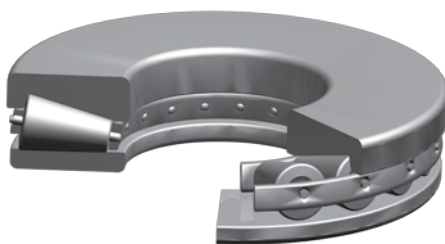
Type TTHDFL thrust tapered roller bearing.
